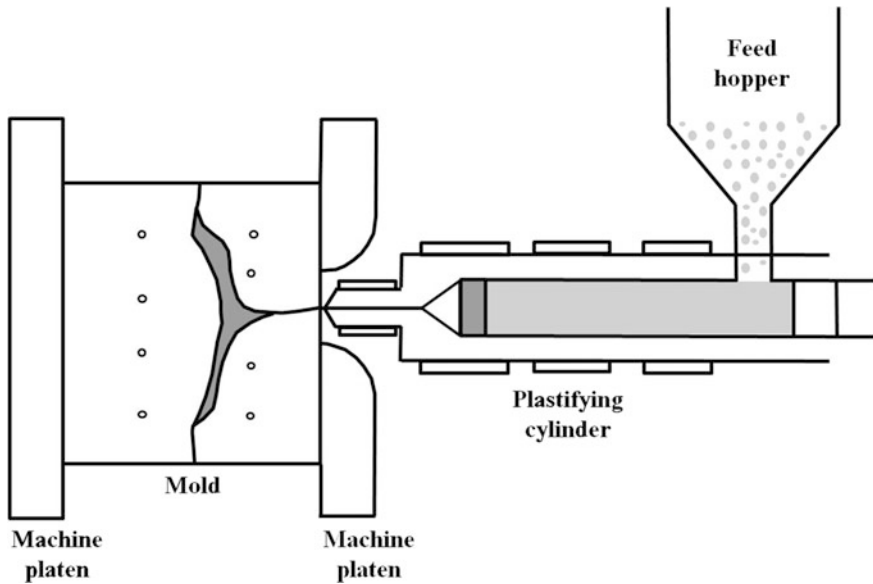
Schematic cross section of the plastifying cylinder and mold
